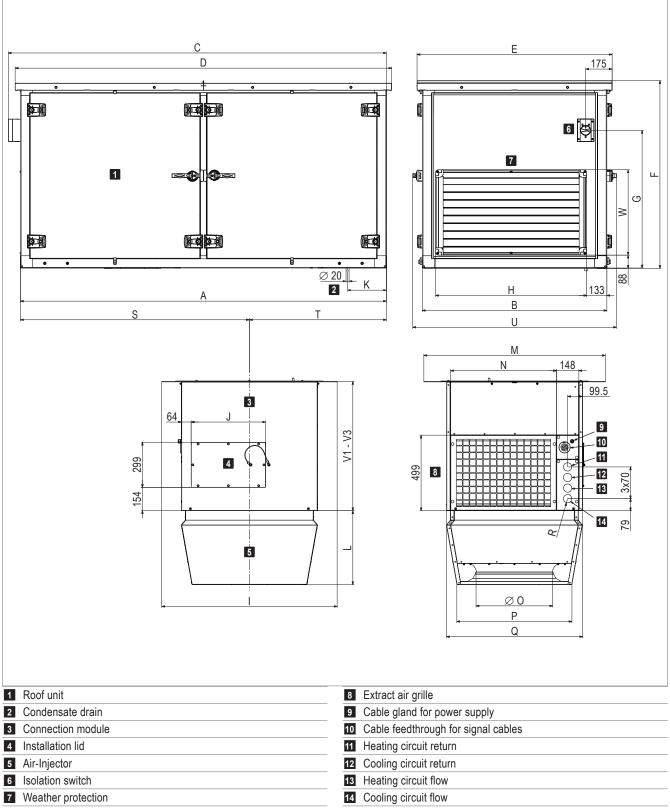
Dimensional drawing for TopVent® SHC with hydraulic assembly throttling circuit (dimensions in mm)
